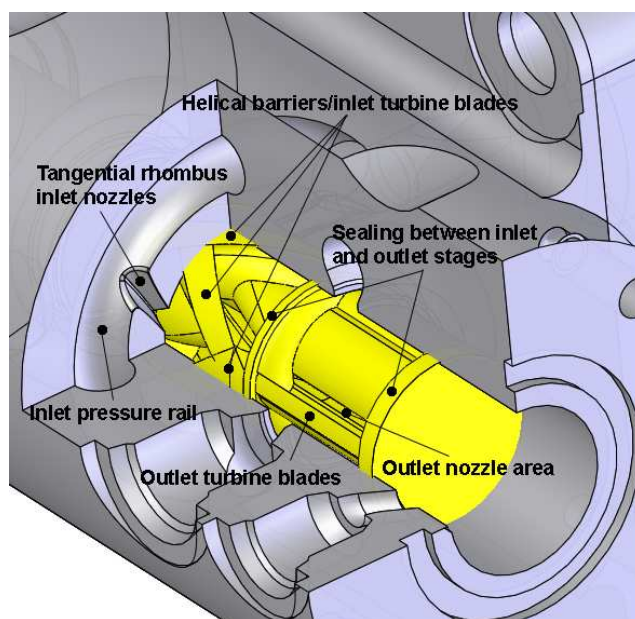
Detailed rendering of rotary spool/sleeve assembly
